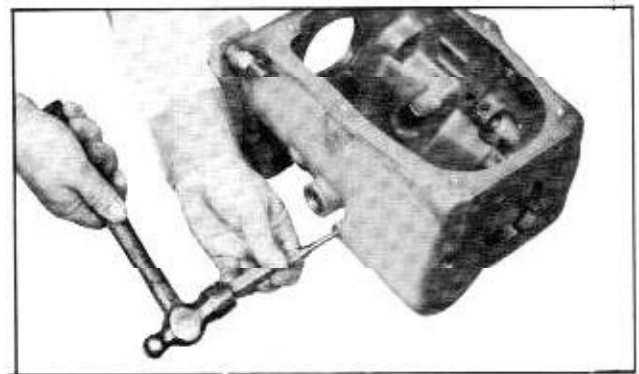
Driving Lock Pin Into Idler Shaft
